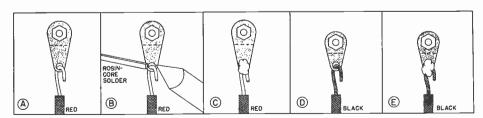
Temporary connections to soldering lugs. A—Temporary hook joint to a soldering lug with solid wire, before soldering; B—Method of soldering a hook joint on a soldering lug. Note that the soldering iron is held on top of the lug, on one side of the wire, and solder is applied to the other side of the wire; C—Your temporary hook joint with solid wire should appear like this after soldering; D—Temporary hook joint with stranded wire, after soldering.
